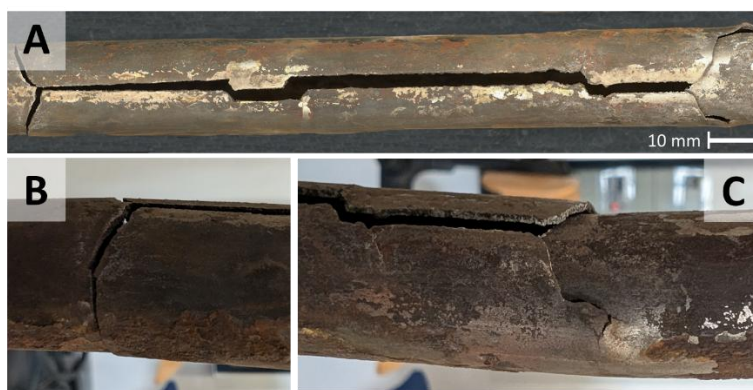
Heat exchanger tube along the fracture a) Reconstruction of the entire fracture using digital optical microscope b), c) Details
